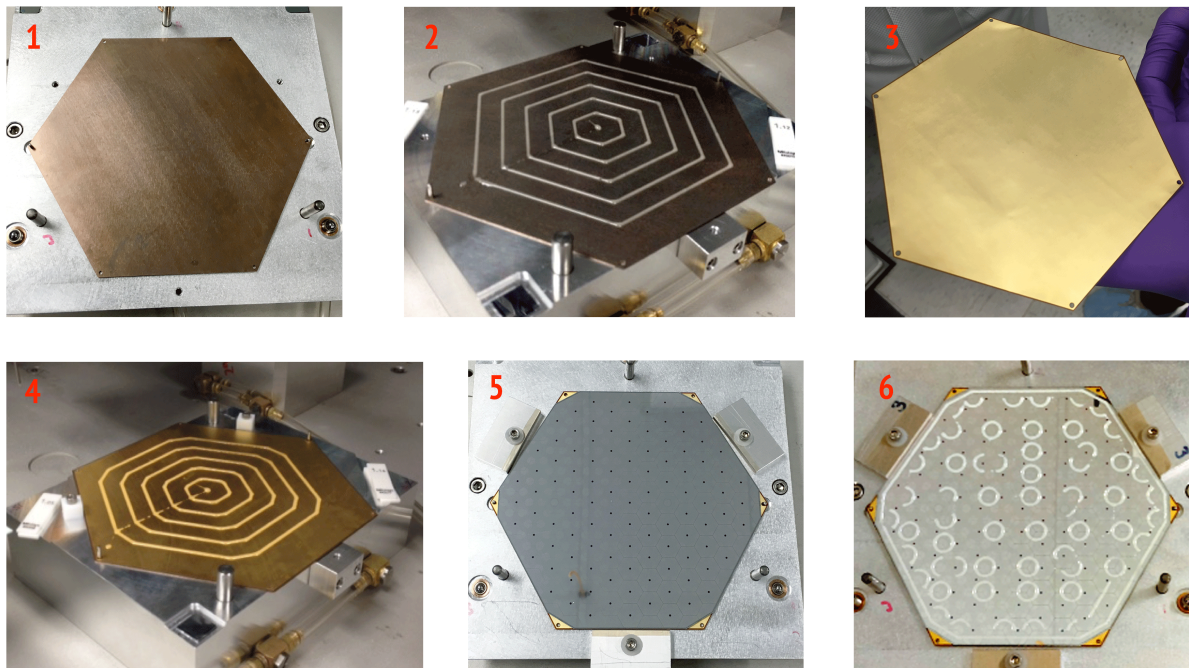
The assembly of one of the modules used in the 2016 beam tests, until the PCB-mounting stage. 1: the CuW baseplate on its gluing jig; 2: addition of Araldite 2111 epoxy; 3: the polyimide gold-plated foil; 4: the polyimide foil glued to the baseplate and with its own layer of glue; 5: the silicon sensor glued onto the polyimide foil; 6: the addition of a special pattern of glue that, when the PCB is attached, spreads over the entire silicon surface except where the wire-bonding takes place.
